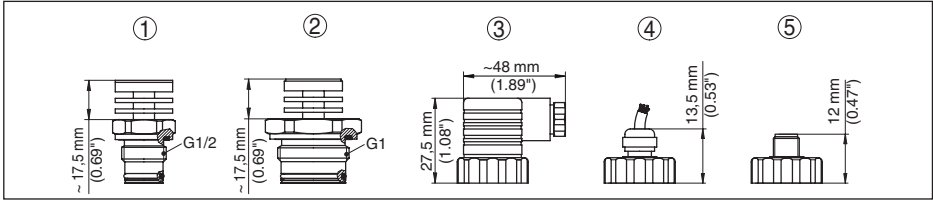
VEGABAR 17 - cooling elements, plug, cable outlet
